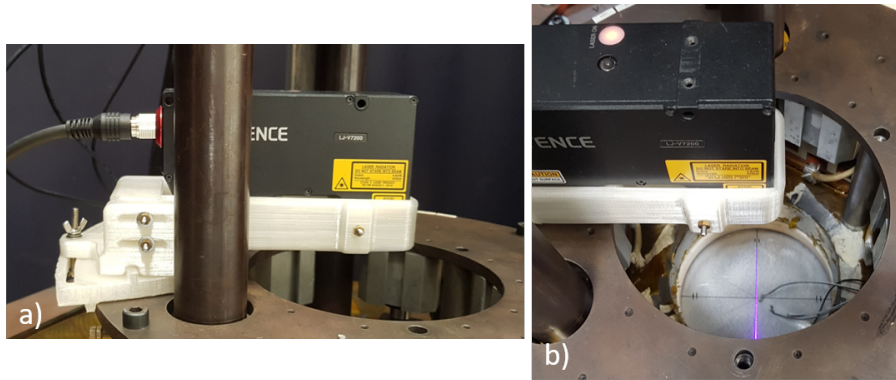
Mounting of the profilometer in the expansion device: a) Profile view of the 3D printed mount assembly; b) View of the laser on the blank's surface.
